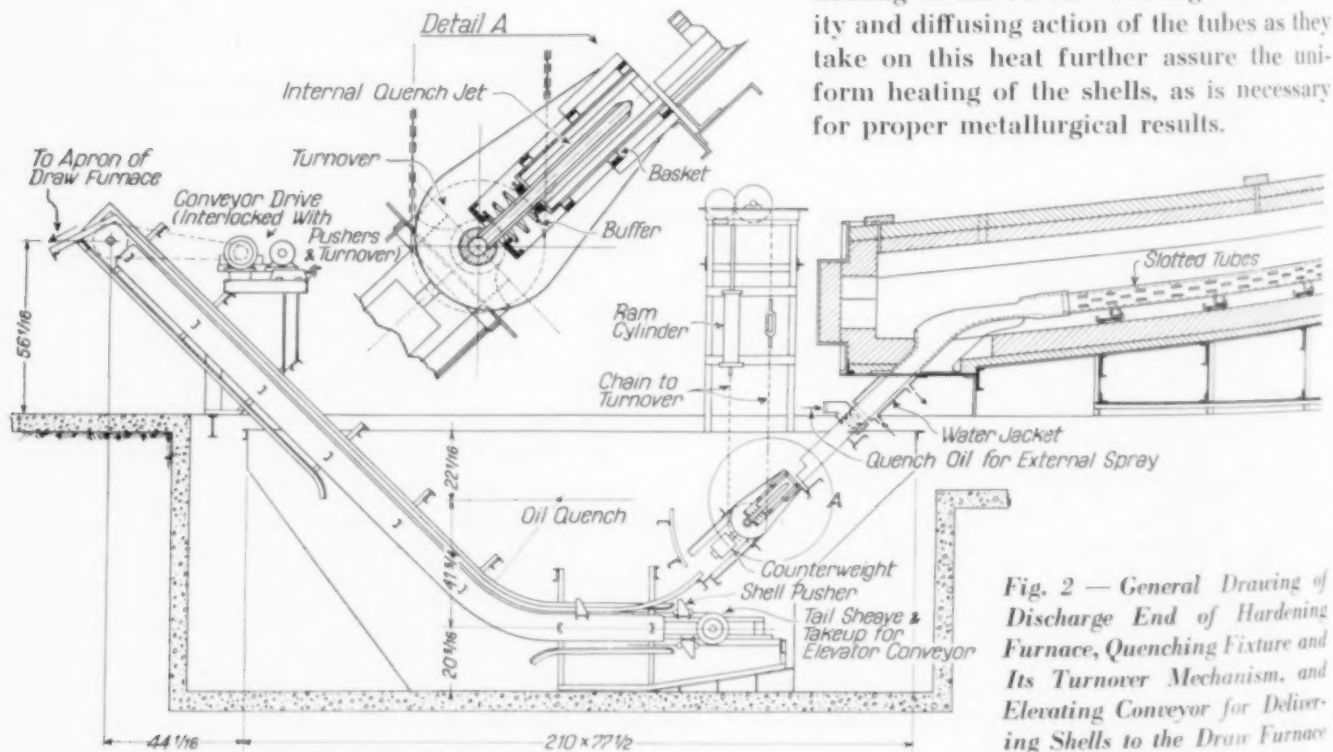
General Drawing of Discharge End of Hardening Furnace, Quenching Fixture and Its Turnover Mechanism, and Elevating Conveyor for Delivering Shells to the Draw Furnace
